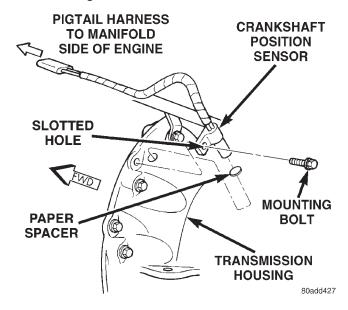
Crankshaft Position Sensor—4.0L 6-Cyl. Engine—Auto. Trans.
